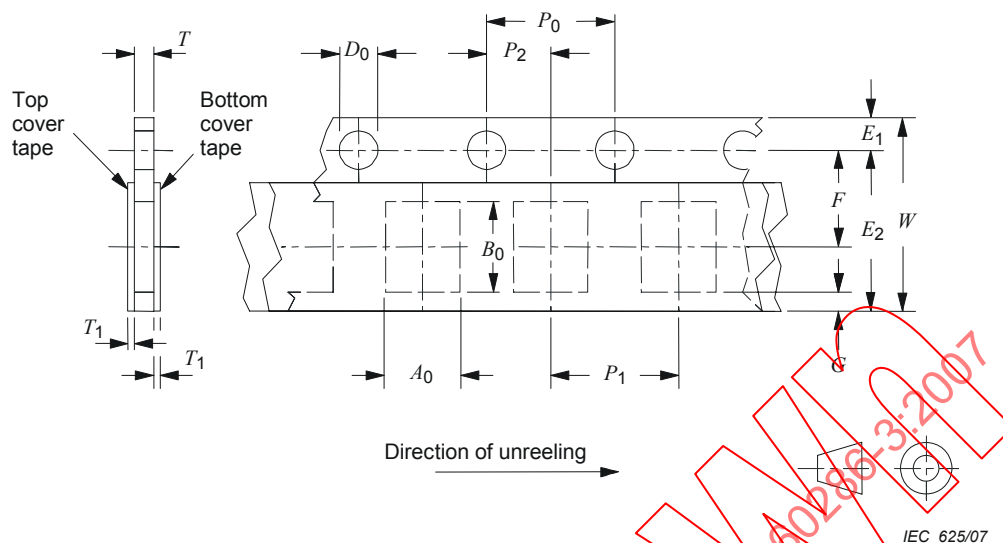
8 mm and 12 mm punched carrier-tape dimensions
